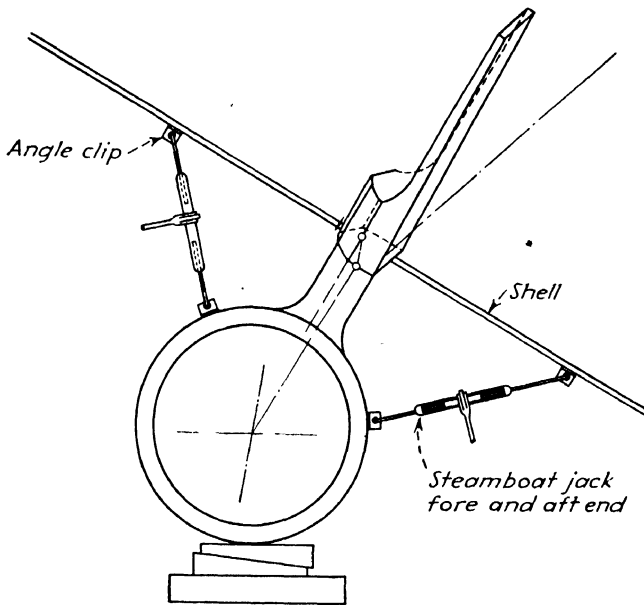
Steamboat jacks being used with flat-bar straps to set struts.
